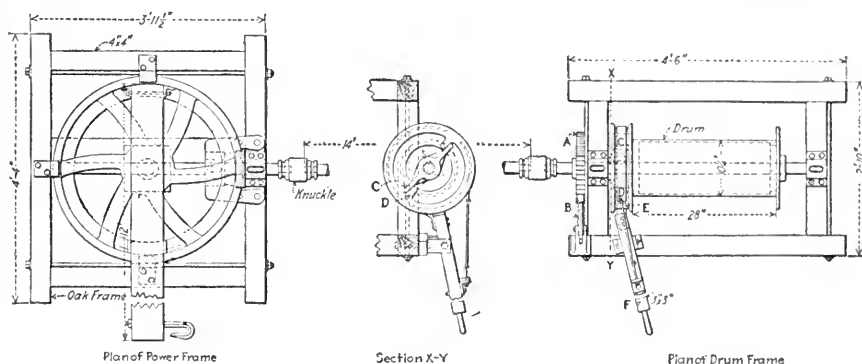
DRIVE GEAR AND HOISTING DRUM OF JOPLIN FRAME.
